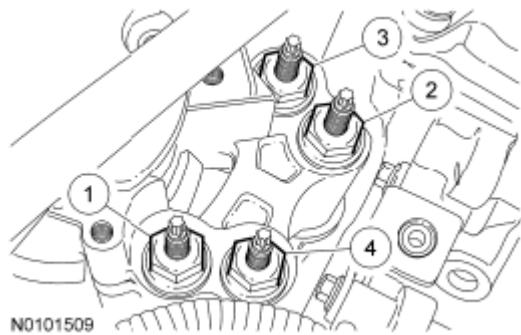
Identifying Engine Mount Nut Tightening Sequence
